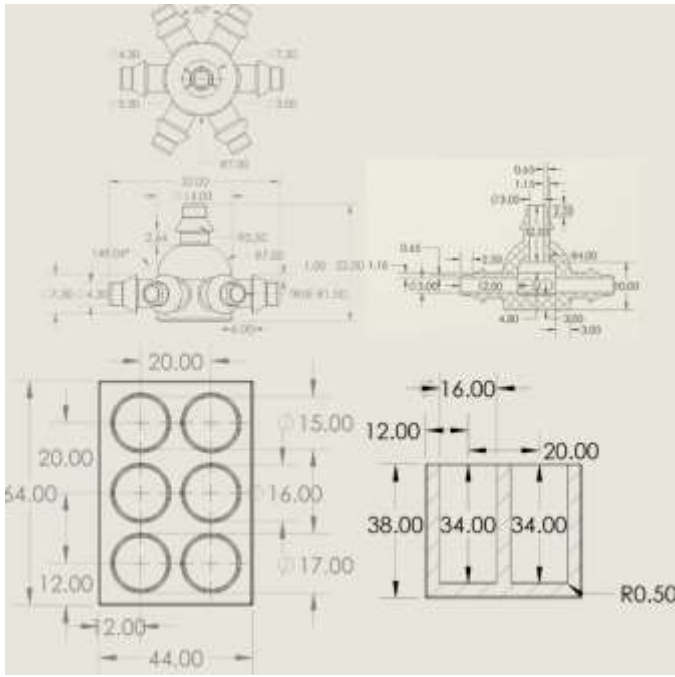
CAD Models and Dimensions of the Splitter (Top) and the Scent Vial Holder (Bottom)
